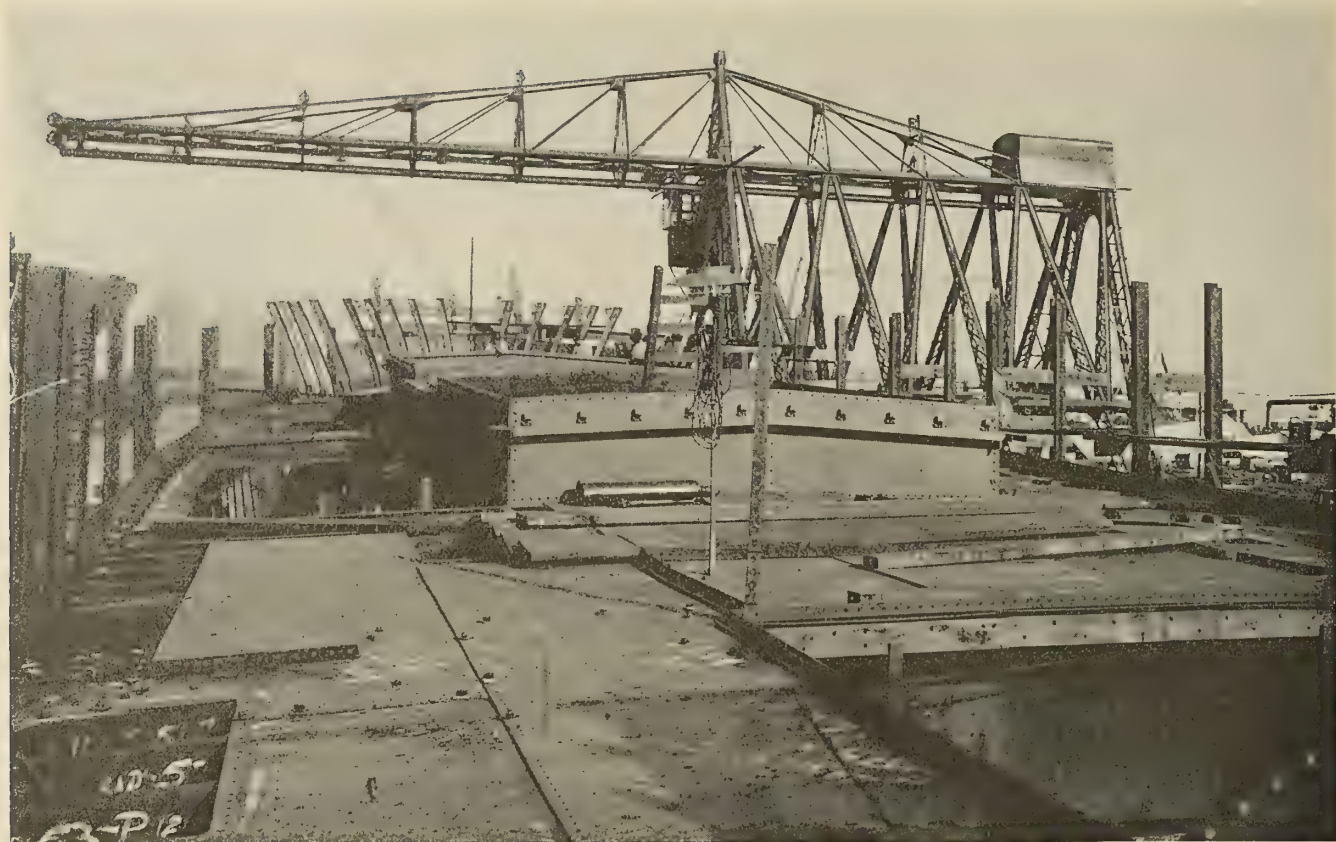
Laying the Deck Plating and Erecting Hatch Coamings
